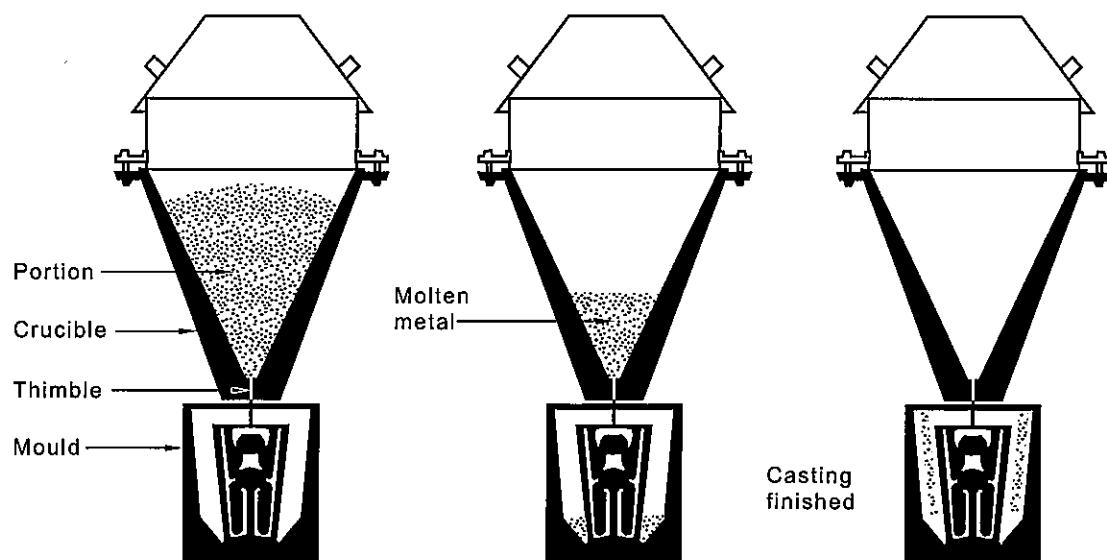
TYPICAL ALUMINOTHERMIC WELDING PROCESS
